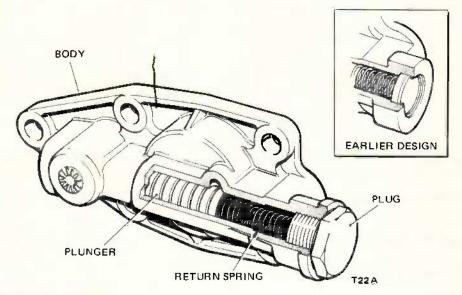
CUTAWAY VIEW OF LOW PRESSURE VALVE
